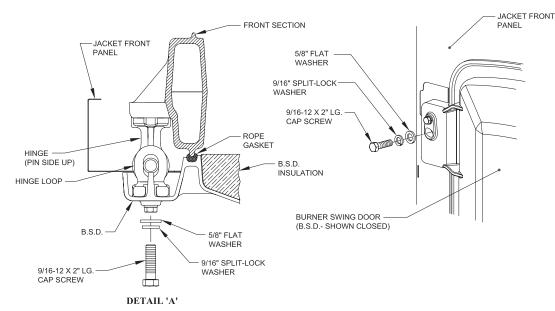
Secure Burner Swing Door for Tight Perimeter Seal
